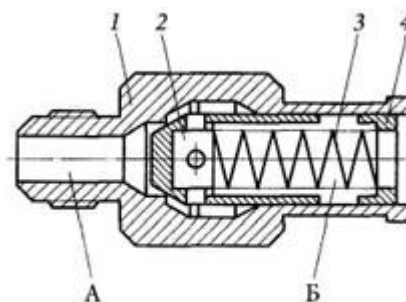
Throttle with check valve: 1 - body; 2- the valve; 3-spring; 4-bushing; A-supply; B-tap
